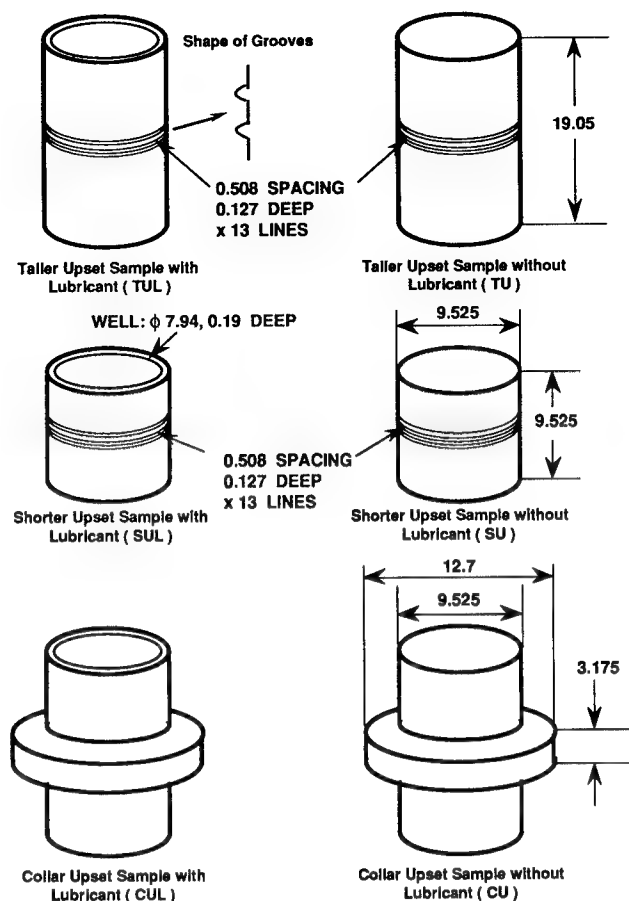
Six sample geometries for constructing forging-limit diagrams, in millimeters.
